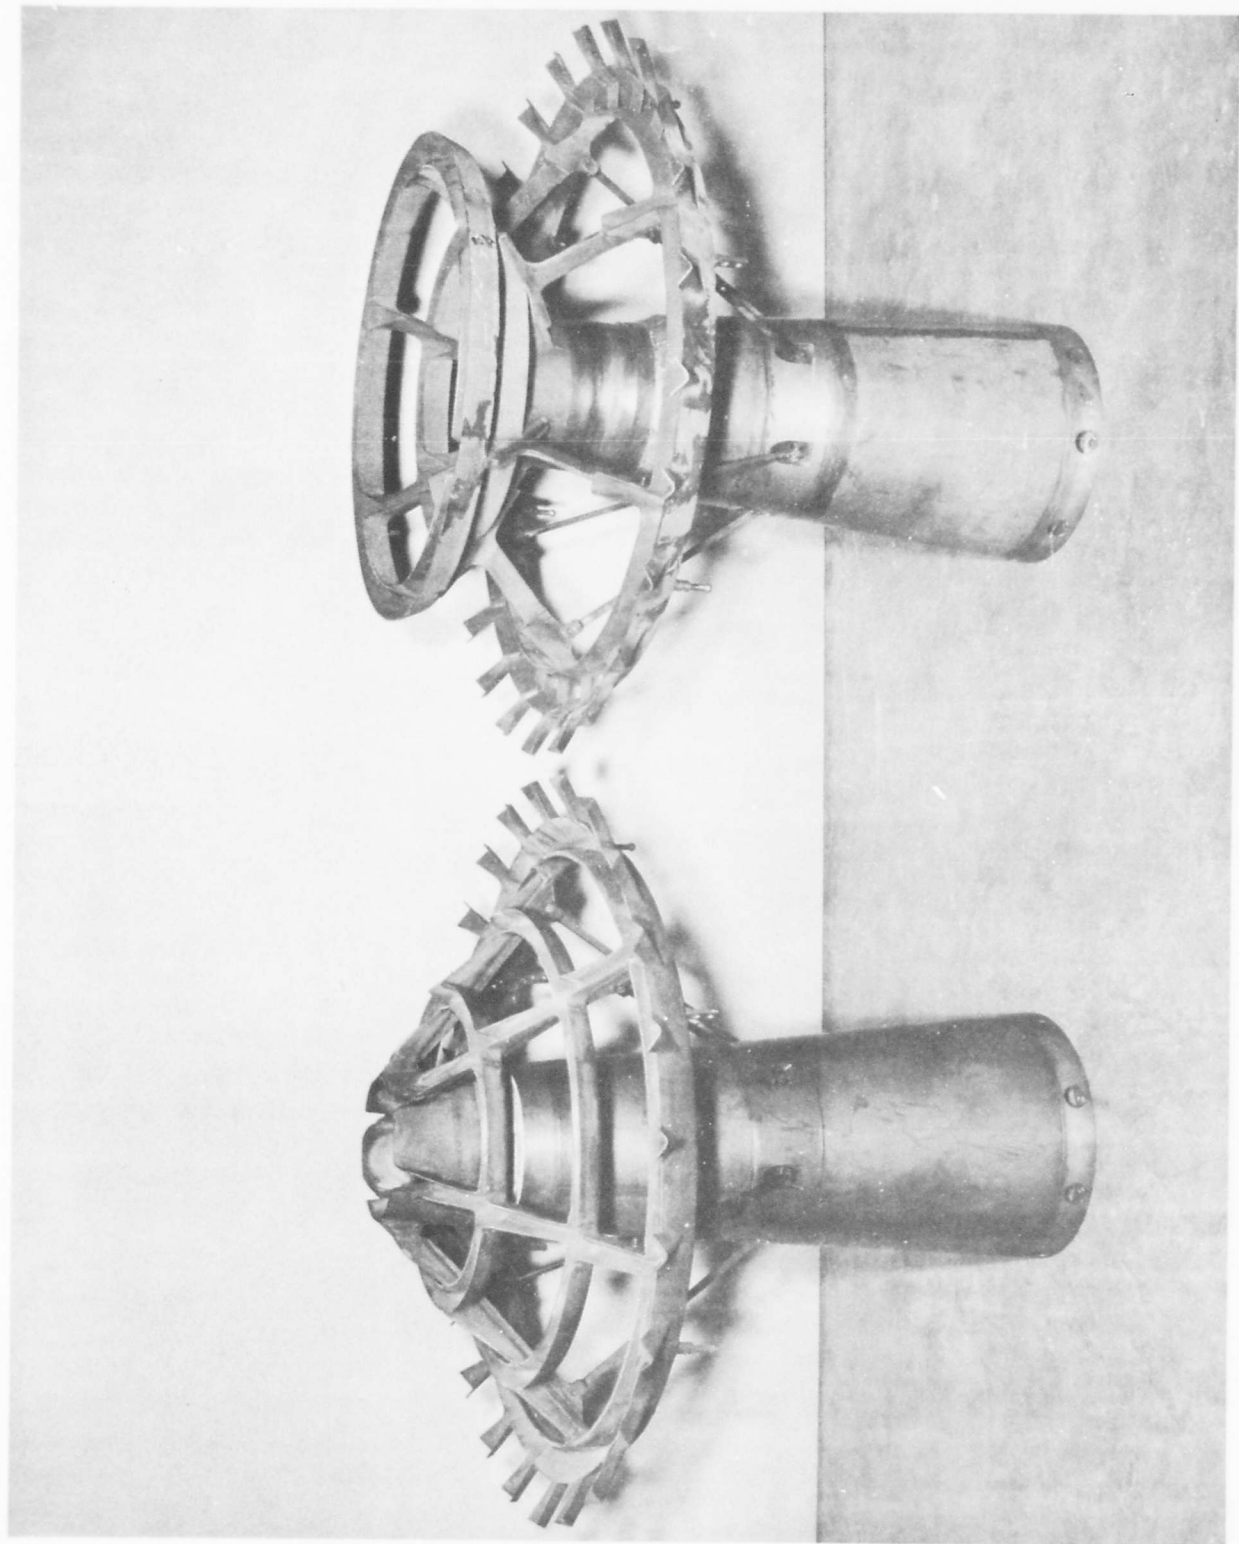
FLAMEHOLDER ASSEMBLIES TESTED
